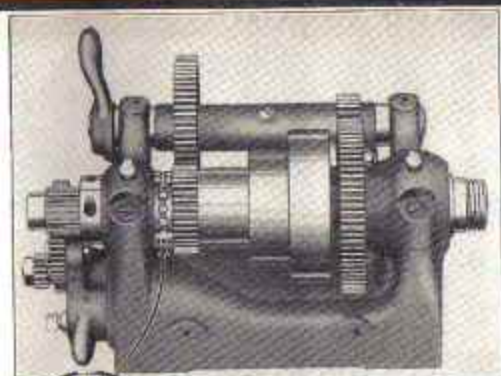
Headstock of 1936 Model 9-inch "Workshop" Lathe
